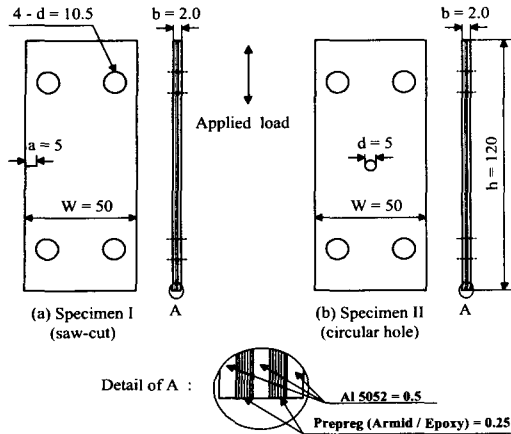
Shape of AFRMLs specimen (a) saw-cut
